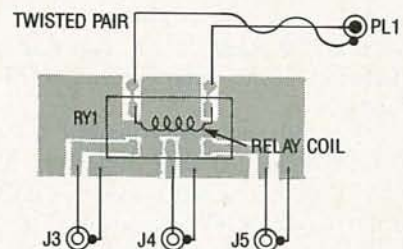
THE RELAY MODULE'S PC board uses a large ground plane; that helps to shield the relay from stray RF-signals that could cause interference.
